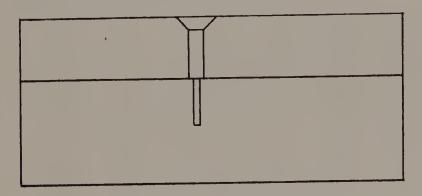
The proper method of drilling a hole for fastening two pieces with screws.
